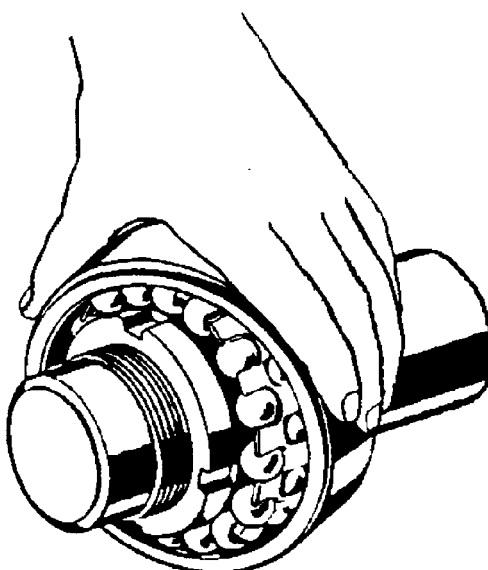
Checking the internal clearance on a self-aligning ball bearing *only for bearings with normal clearance*. (Courtesy SKF Canada Limited)
